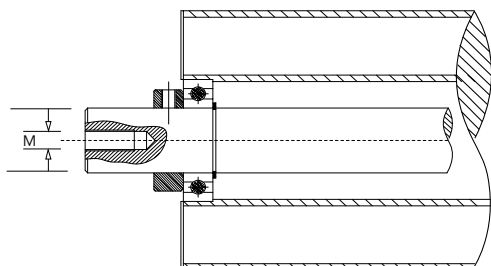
Example of idle roller on bearing and ABU ring for through-shaft
